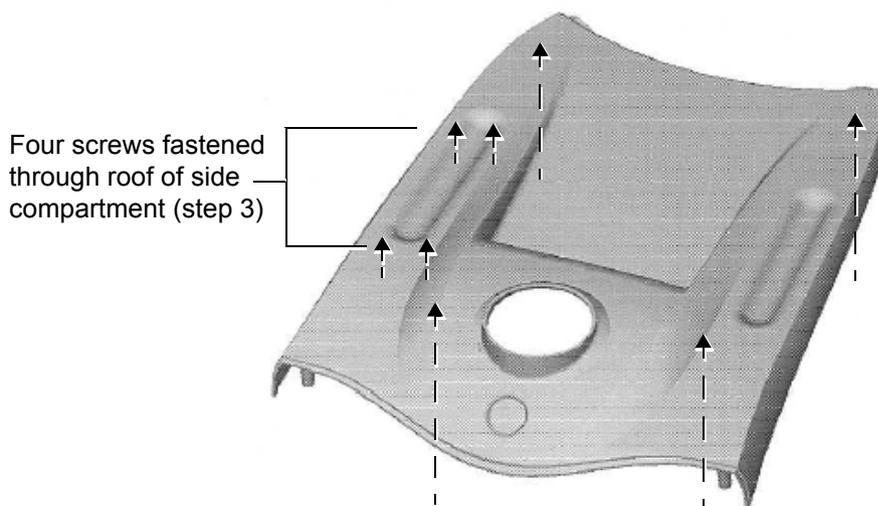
Location of Screws on the Control Console Upper (Rear) Cover
